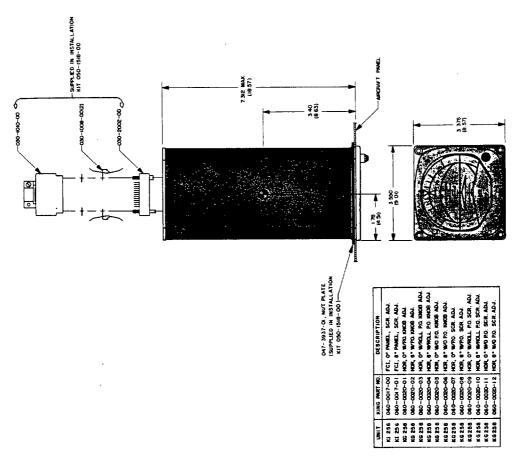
B KG 258/KI 256 INSTALLATION DRAWING
